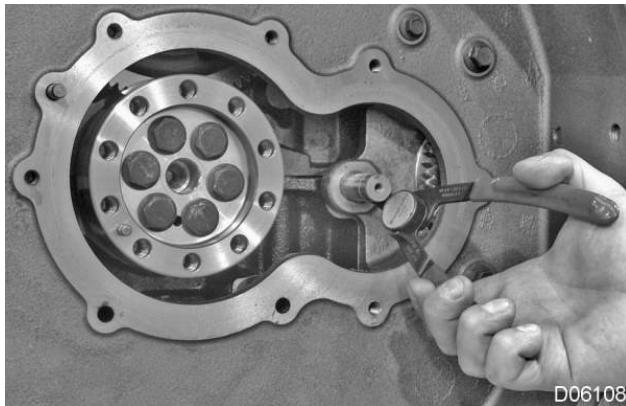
Remove Idler Gear Shaft Inner Retaining Ring (alternate method)
